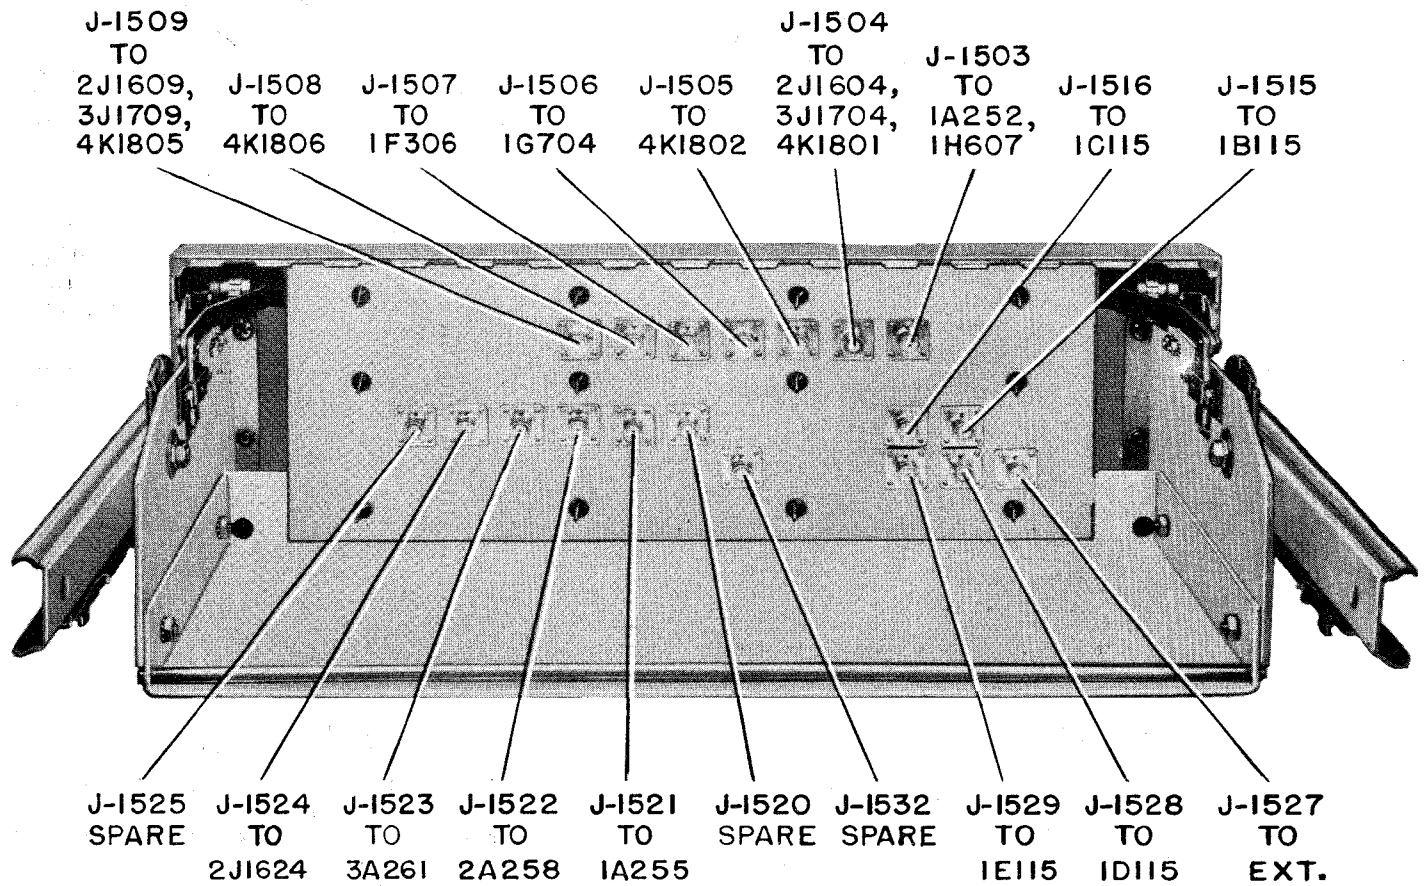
Component Locations Rear View, Patch Panel SB-138/FRR-24
